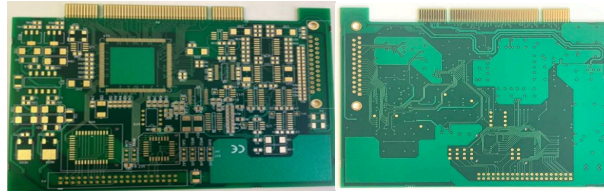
Custom made PCB left - top side of the PCB; right - bottom side of the same PCB.
